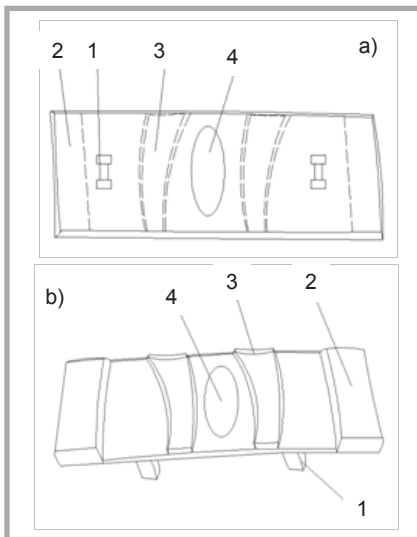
Airflow guide device [13]; a) front structure scheme, b) back structure scheme: 1. Upper part connecting the roller bracket. 2. Bottom supporting part above the hollow roller. 3. Double trumpet shaped channels. 4. Ellipse shaped air inlet channel.
